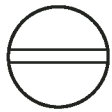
Round washer head screws can be used to center or position one object in relation to another without being exact when drilling.
